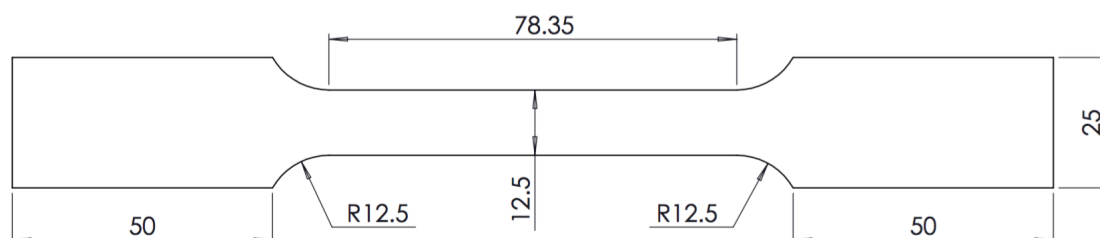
Dimensioned drawing of the tensile test specimen used for material characterisation. All dimensions in mm.
